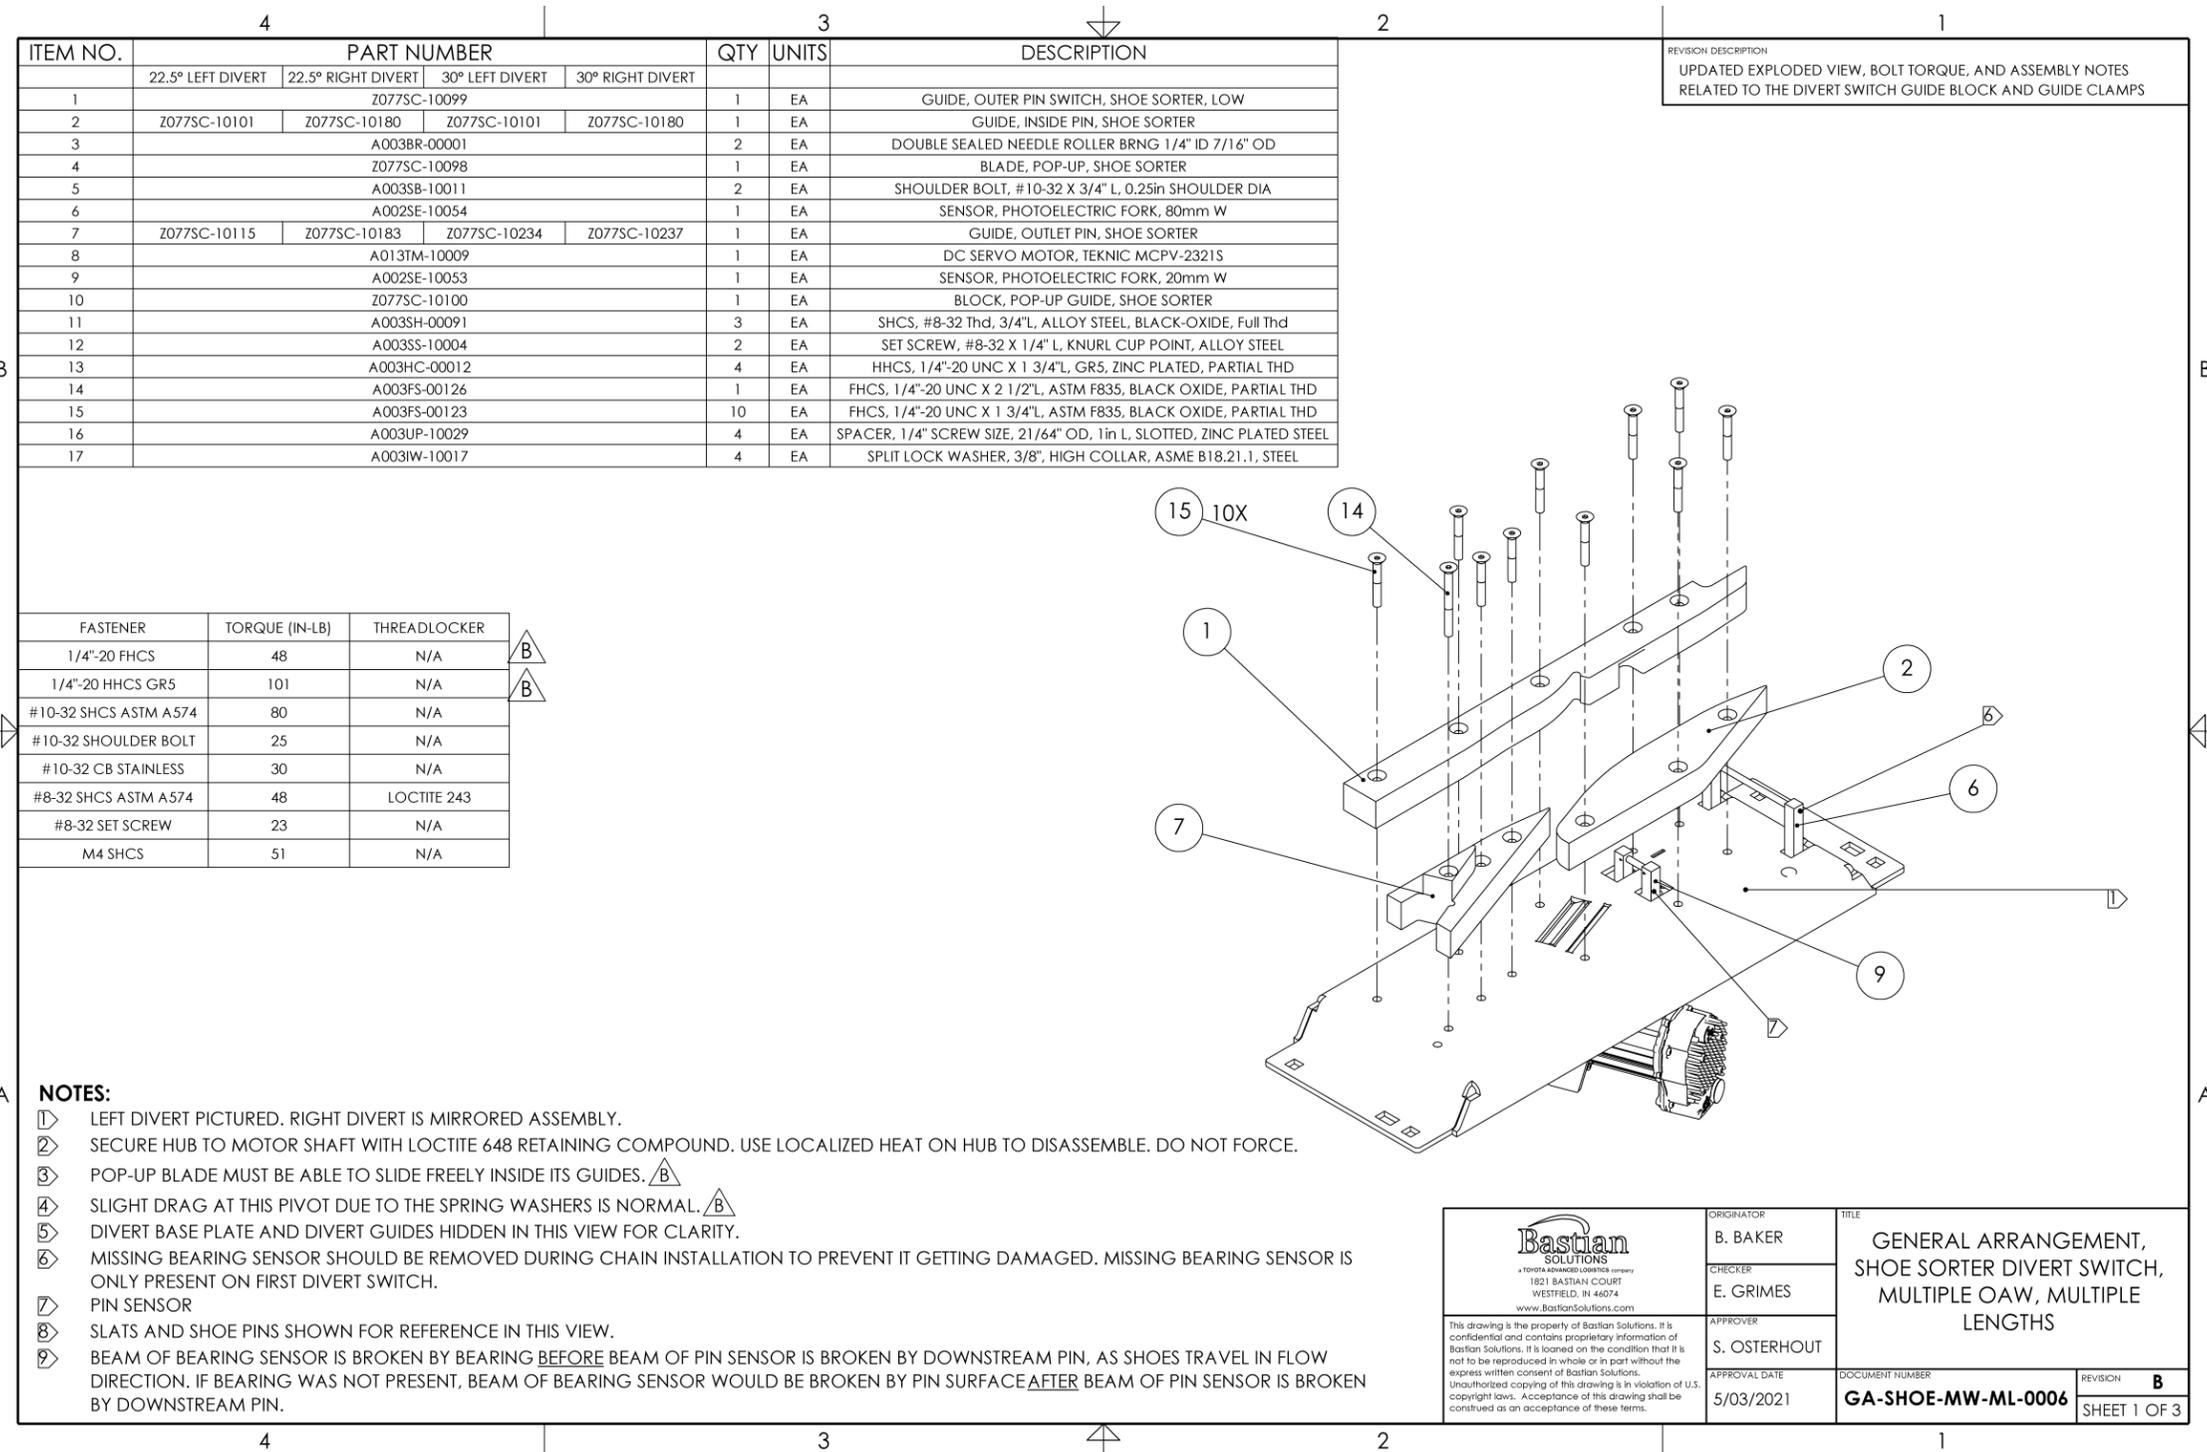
General Arrangement, Shoe Sorter Divert Switch, Sheet 1 of 3
